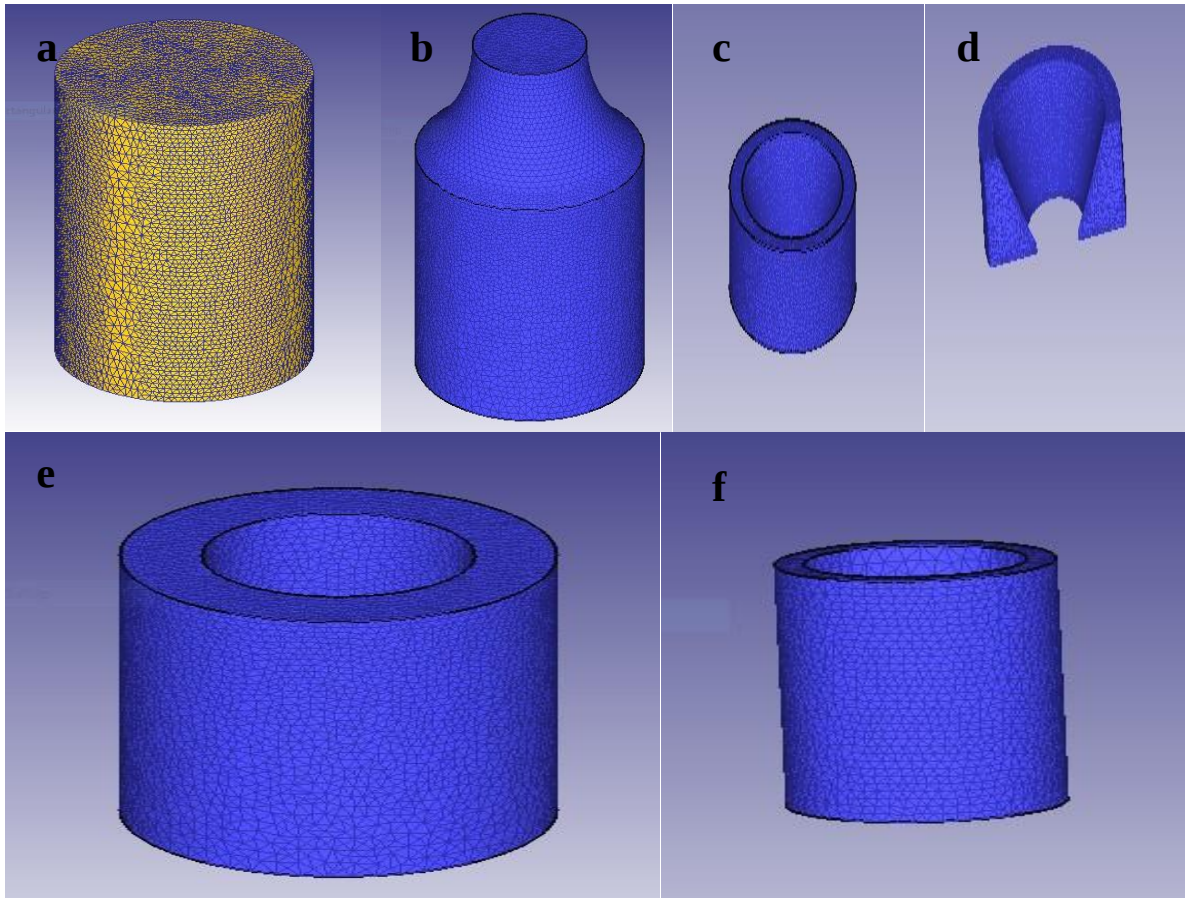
Simulation setup meshed model (a) workpiece (b) top die (c) bottom die (d) section bottom die (e) container (f) holder
